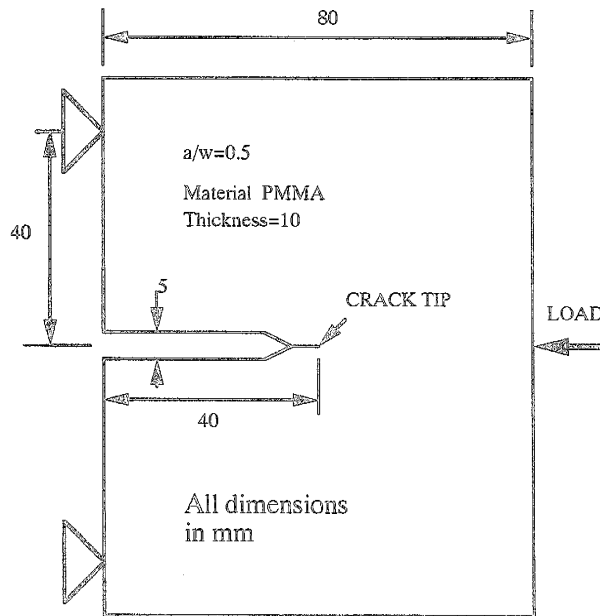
SPECIMEN USED FOR EXPERIMENTS
